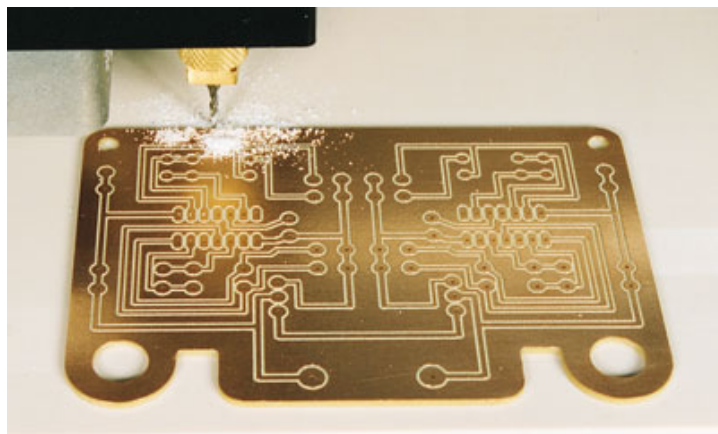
PCB drilling (http://www.techsoftuk.co.uk/pcb_drilling.jpg)
